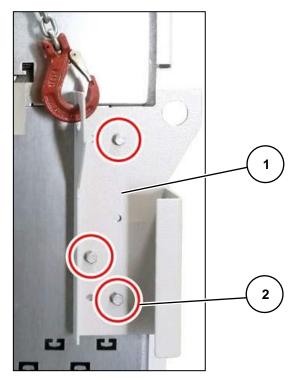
Craning angle (1) mounted at the side of the panel front (3 bolted joints), shown here with crane hooks
